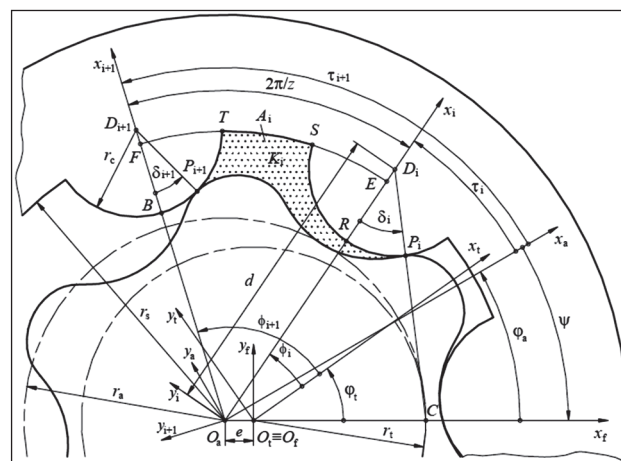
Schematic presentation of the gerotor pump gear pair with basic geometrical dimensions
